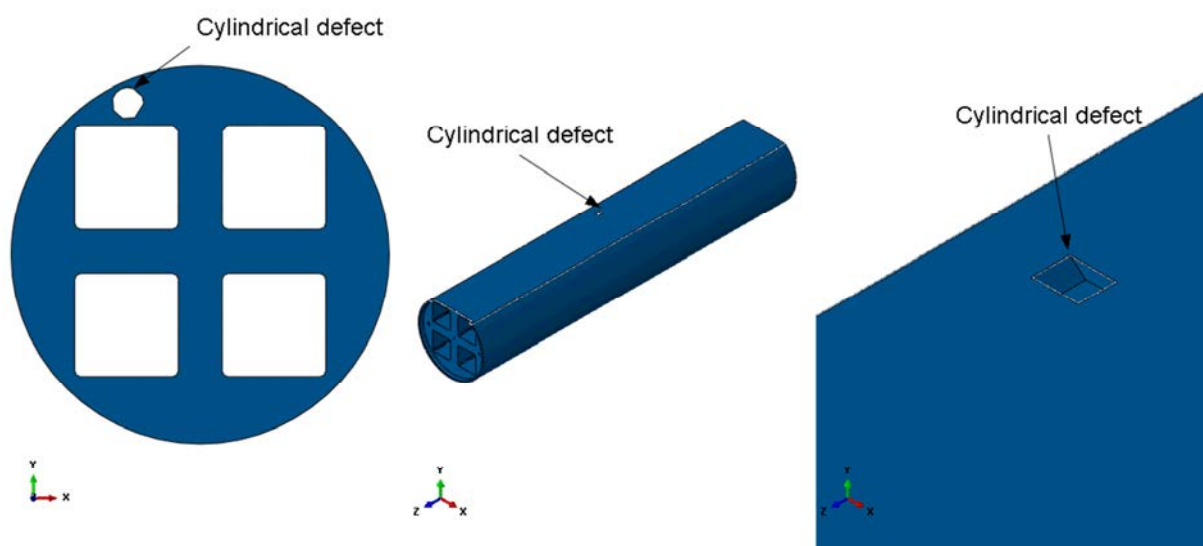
PWR insert with a cylindrical defect, top view (left) and isometric view (middle and right).
